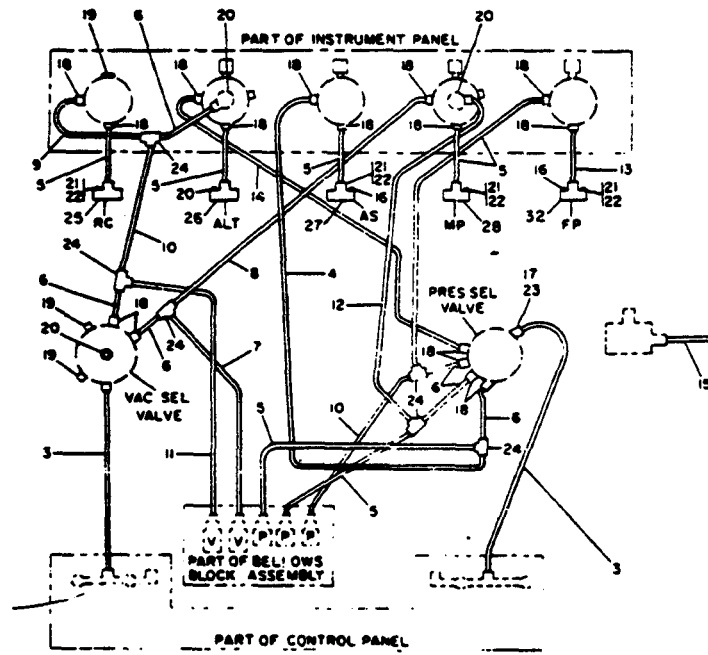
Instrument Panel Assembly (Sheet 2)
